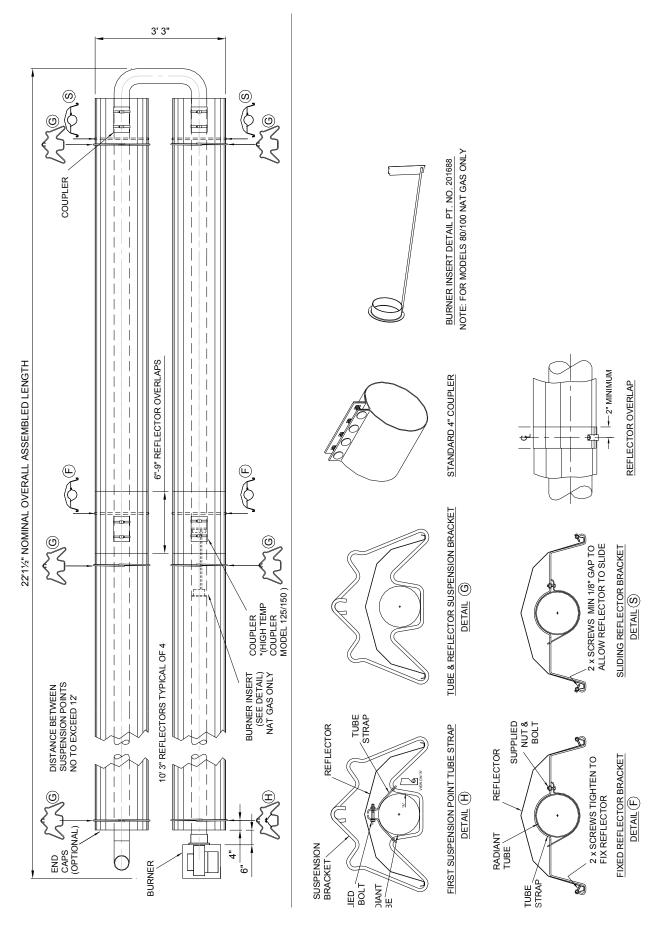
Heater Assembly: Model U tube 125-U60, 150-U60, 170-U60 and 200-U60
